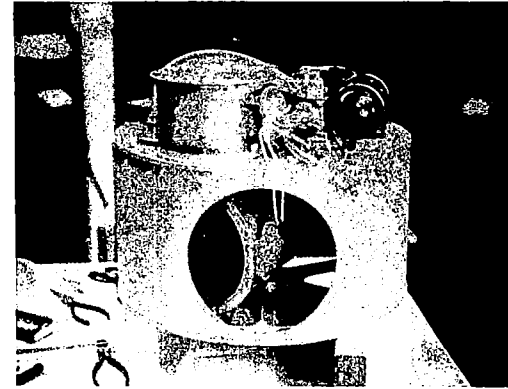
INVERTED INNER ASSEMBLY, SIDE VIEW
